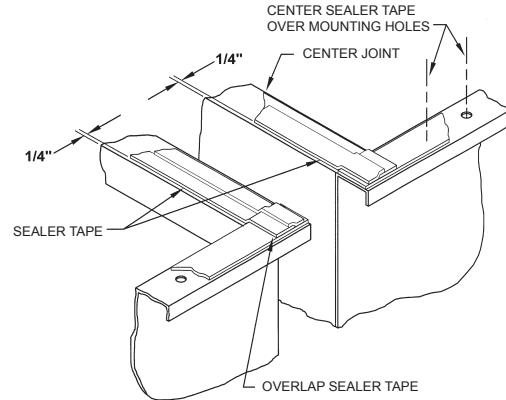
Sealer Tape Detail for Center Joint of Units with two more Top Sections.
